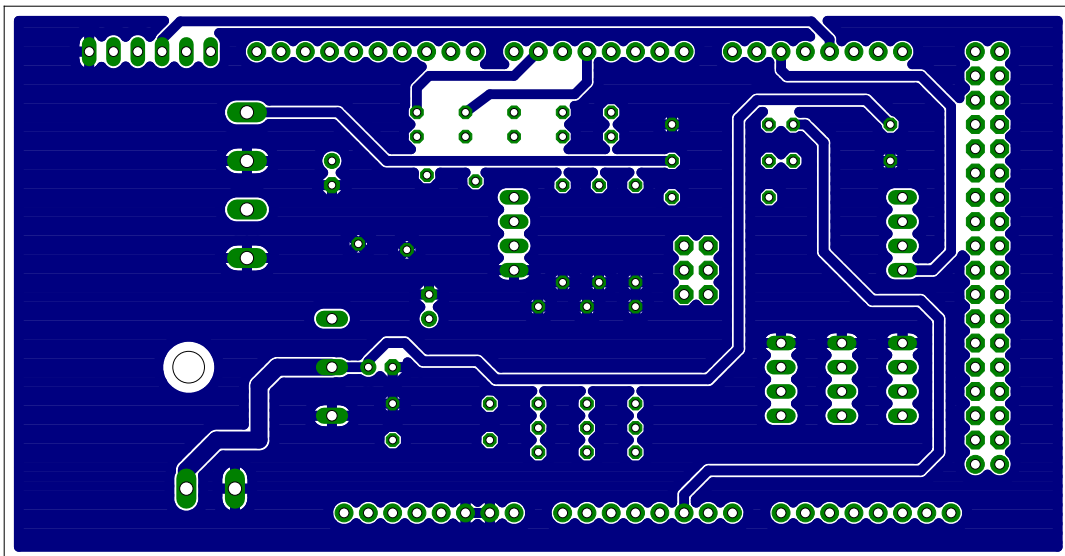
Bottom copper layer the PCB of the Arduino shield.
